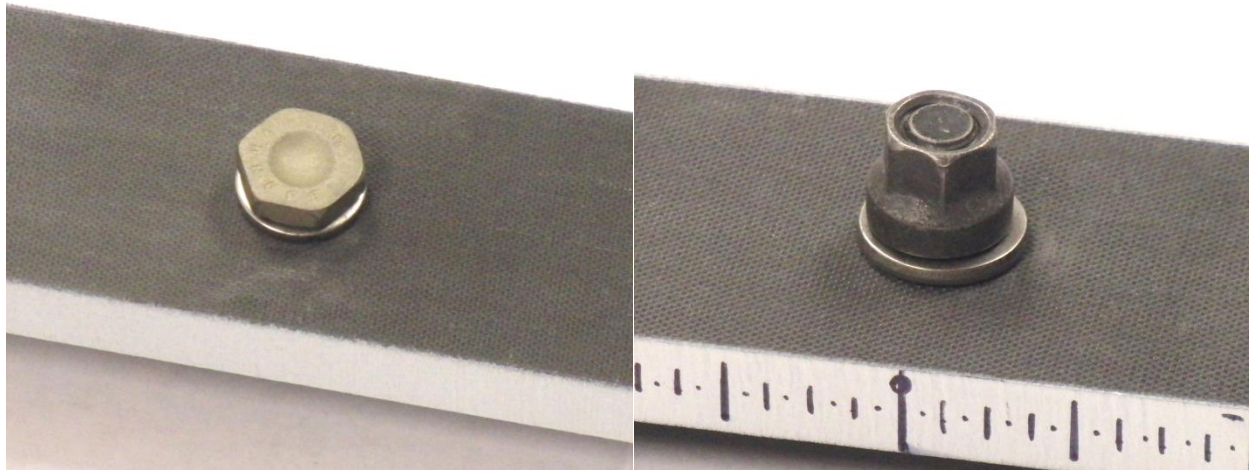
Specimen with fastener installed: (a) fastener head side and (b) fastener collar side [3]
